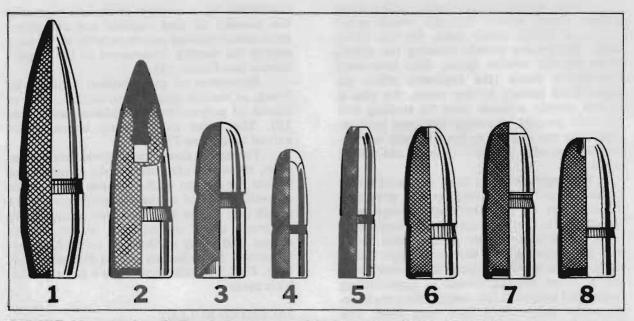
Modern bullet design is exemplified by these Remington bullets: (1) metal jacket boattail; (2) bronze-point expanding; (3) metal jacket, solid or "full-patch" point; (4) inner belted soft-nose; (5) "Core-Lokt" hollow-point; (6) metal jacket hollow-point; (7) soft-point; (8) metal jacket hollow-point. (Cross-hatching represents the lead core, the heavy black line the jacket.)
